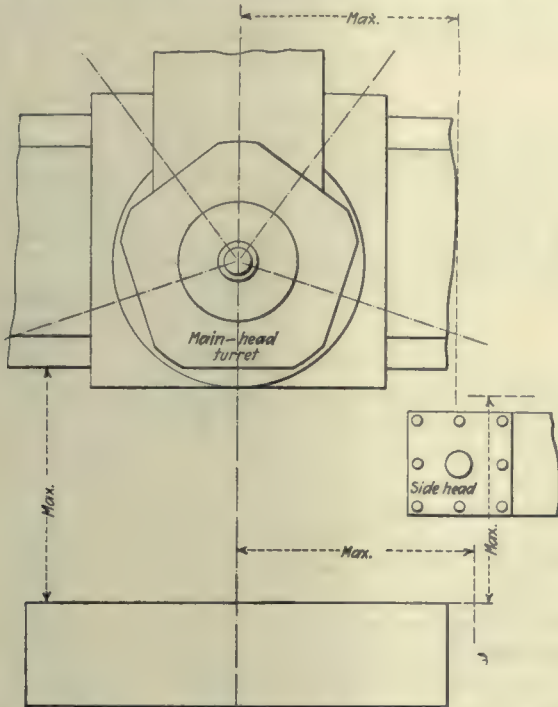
DIAGRAM FOR TOOL LAYOUTS ON VERTICAL TURRET LATHE
